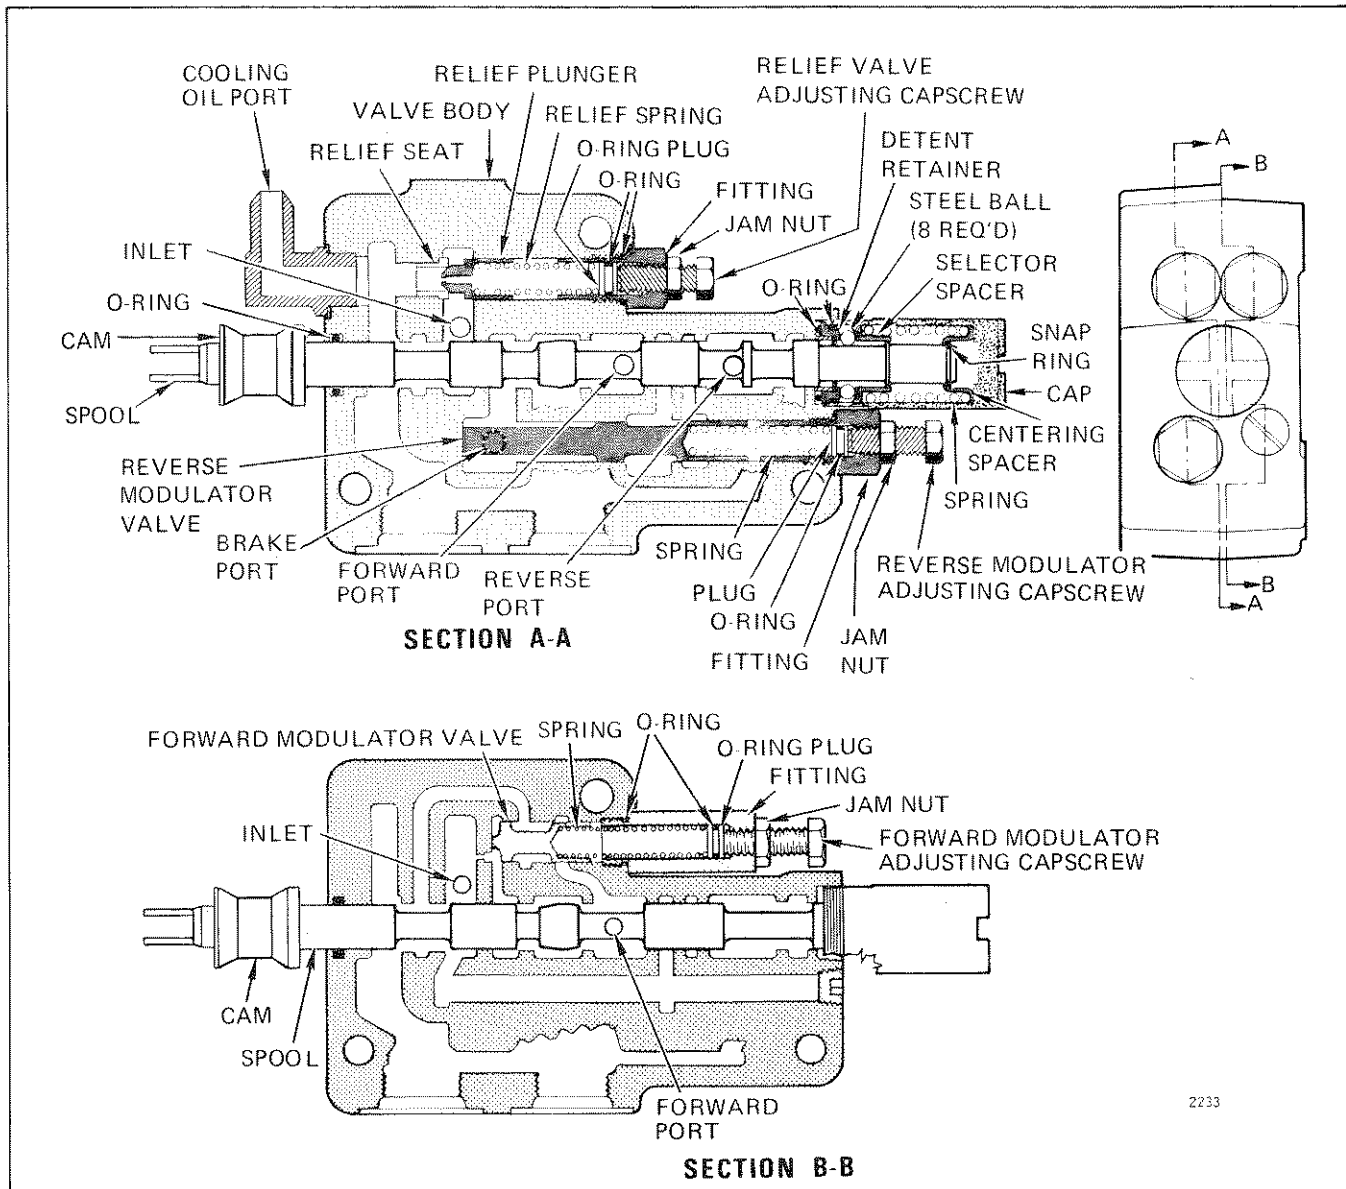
CONTROL VALVE ASSEMBLY POWER-FORWARD/REVERSE WINCH (PFR)
